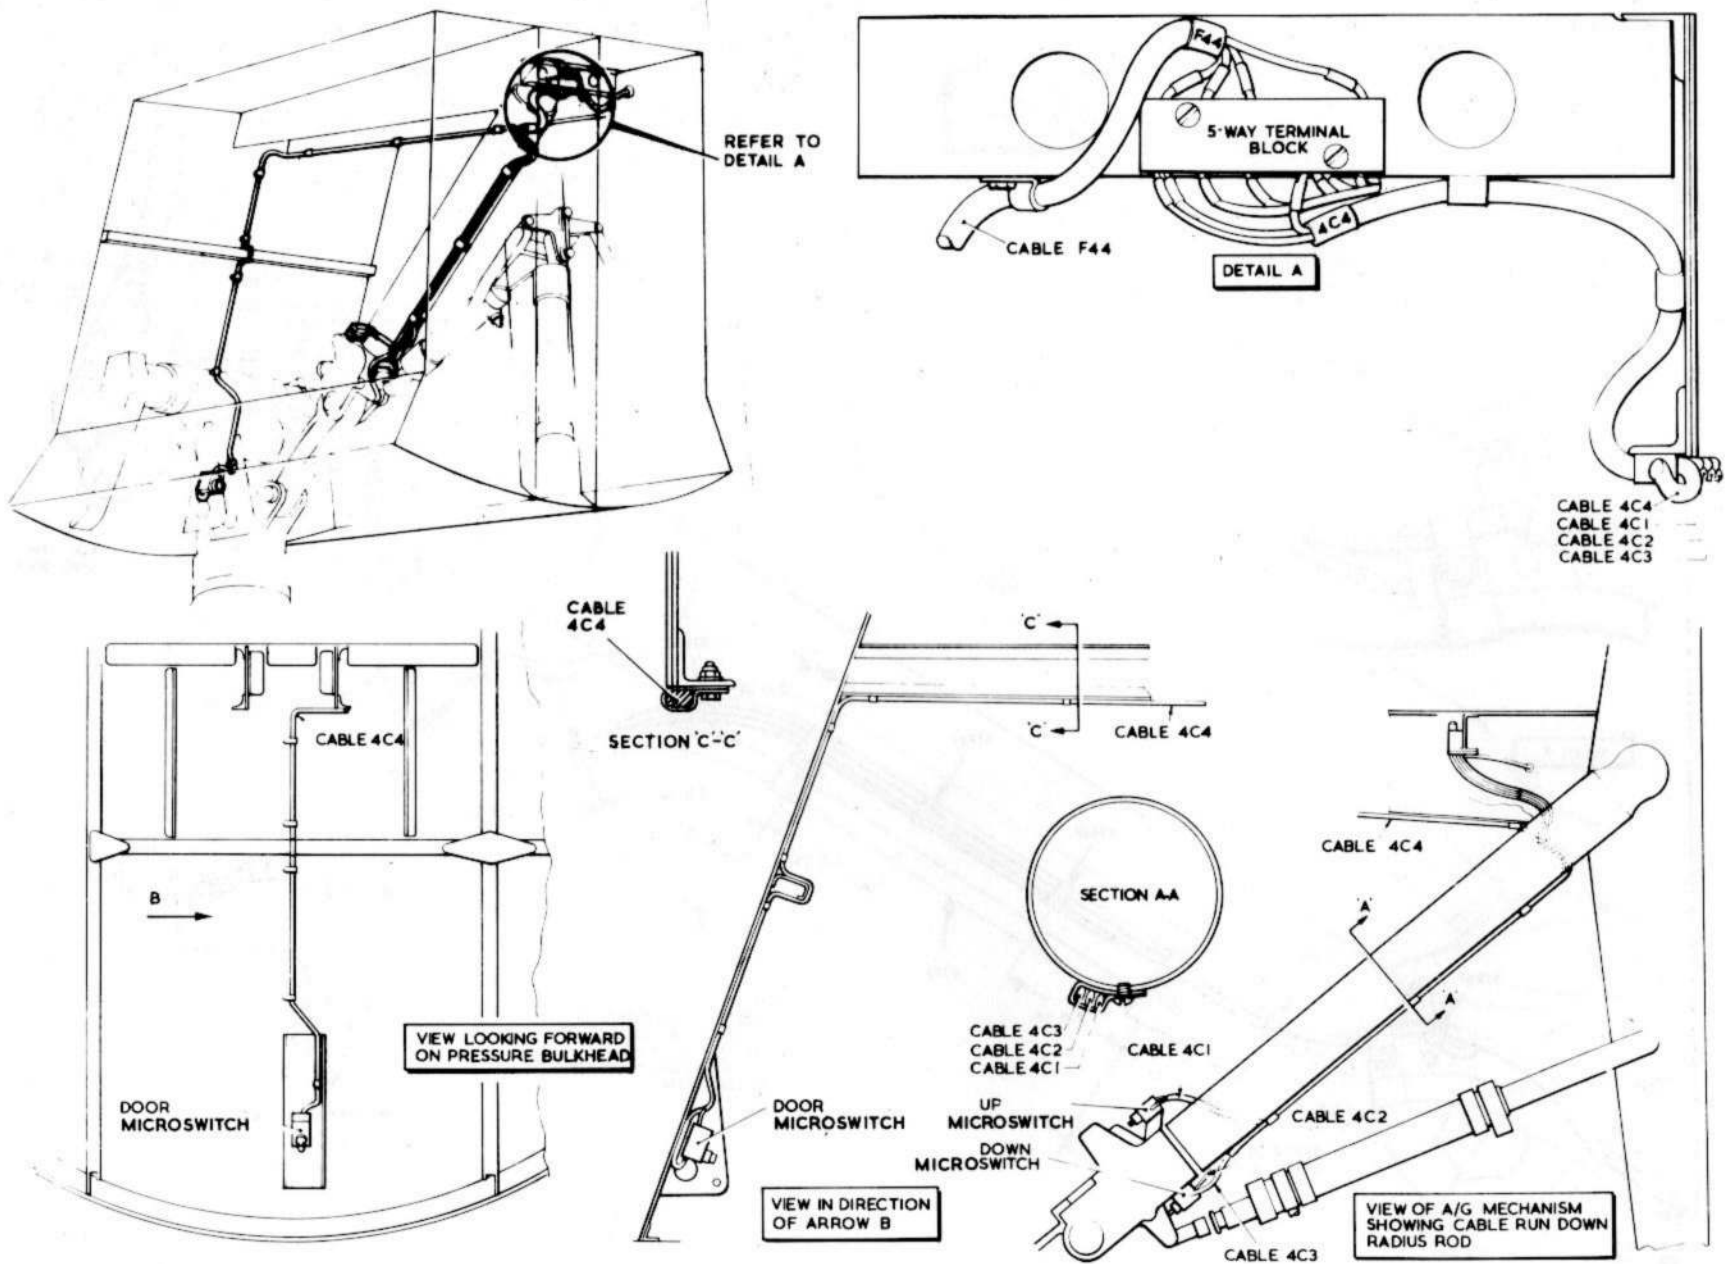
NOSE WHEEL - WIRING INSTALLATION
